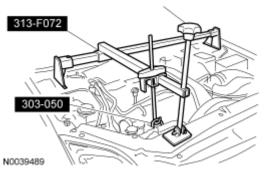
Lifting Engine Using Special Tool (303-050, 313-F072) Courtesy of FORD MOTOR CO.
